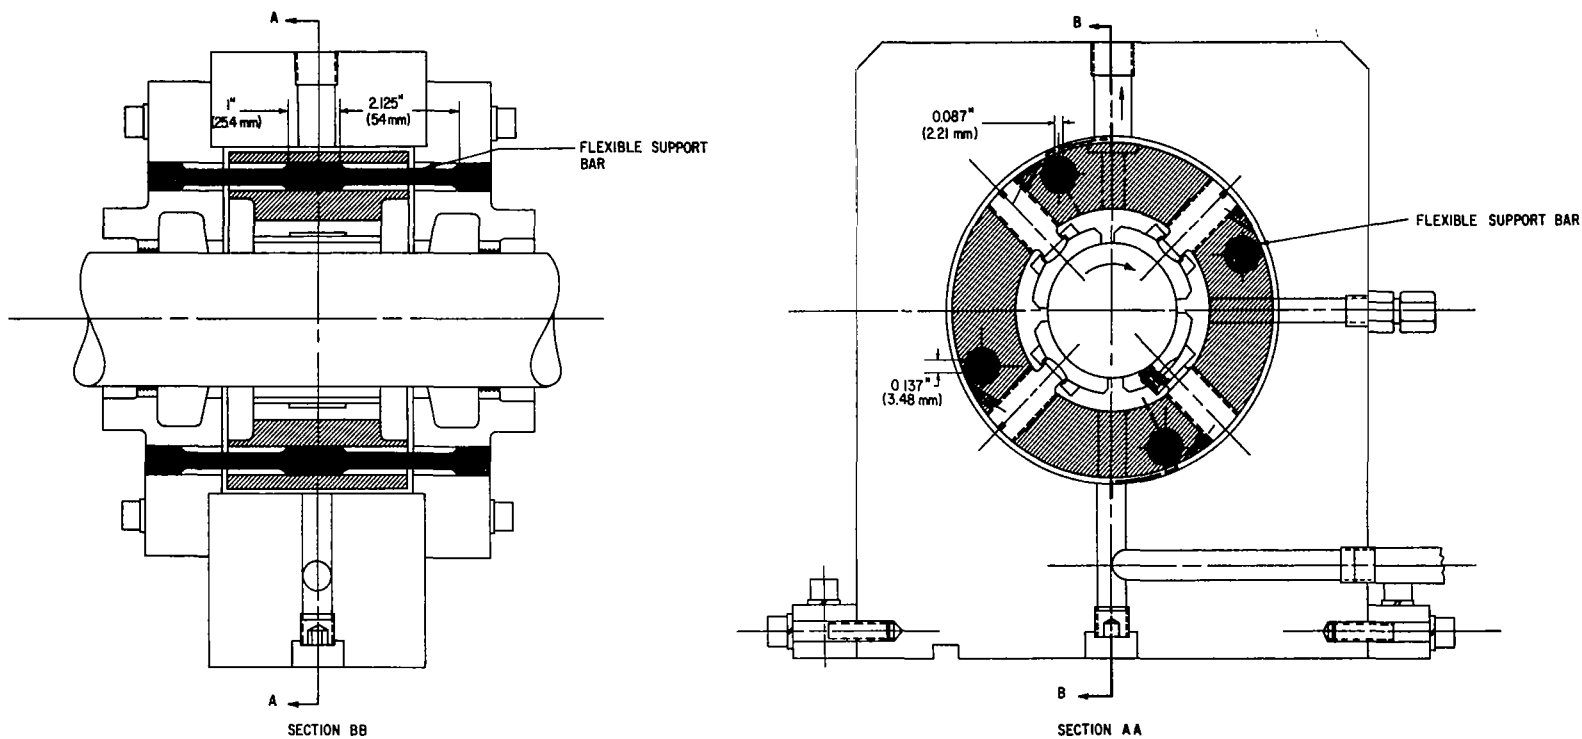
Flexibly-Mounted Journal Bearing Support Structure
